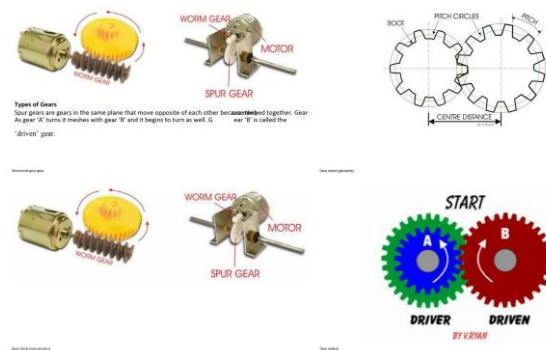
Gear and drive mechanisms considered in the cleaning system.
